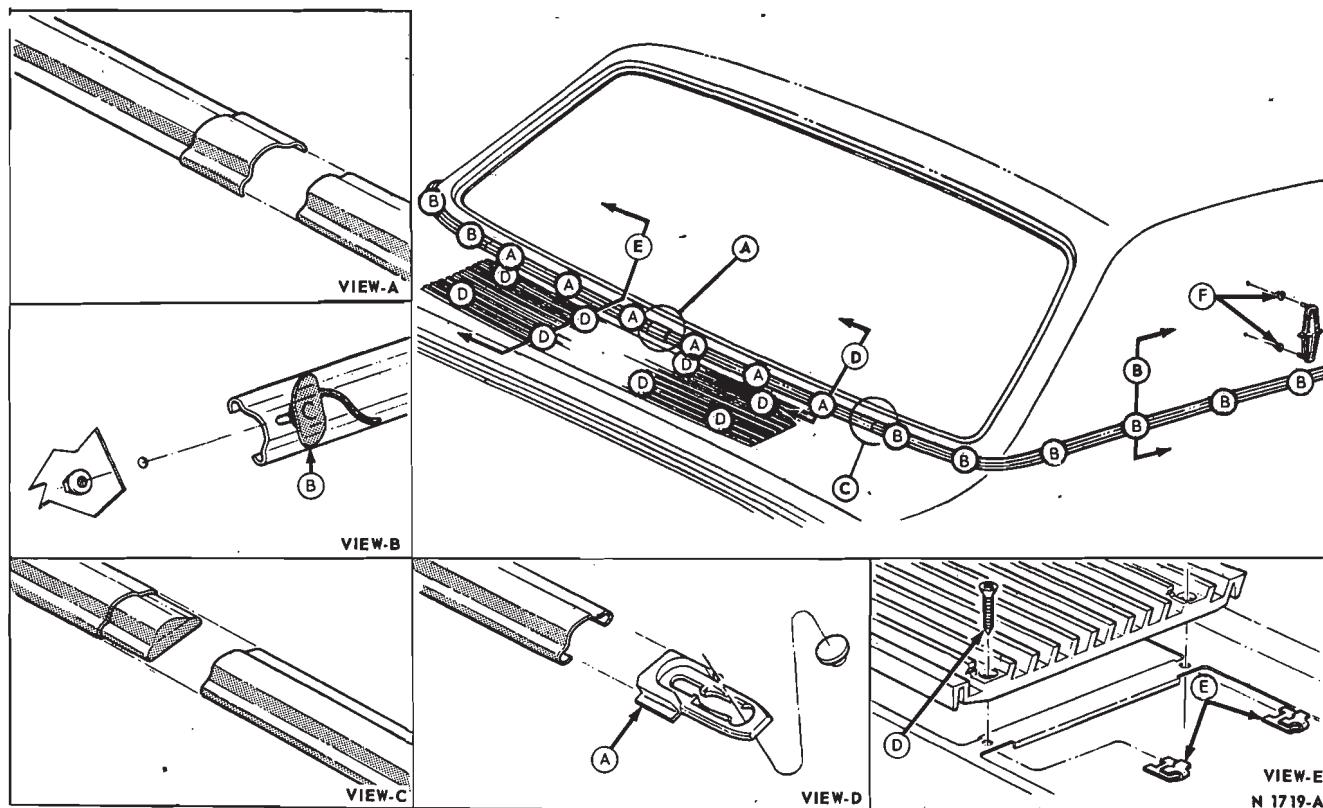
Continental Mark III Rear Belt Moulding and Air Vent Grille Installation
